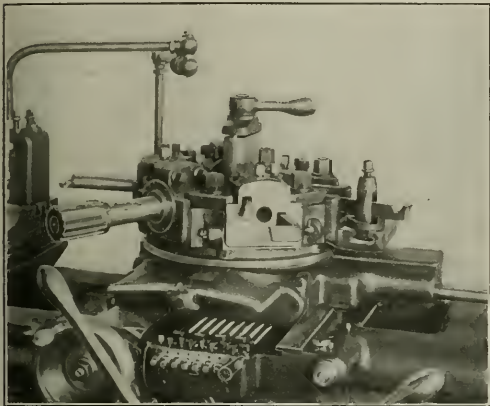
General View of Turret with a Set of Tools for Casting in Place.
